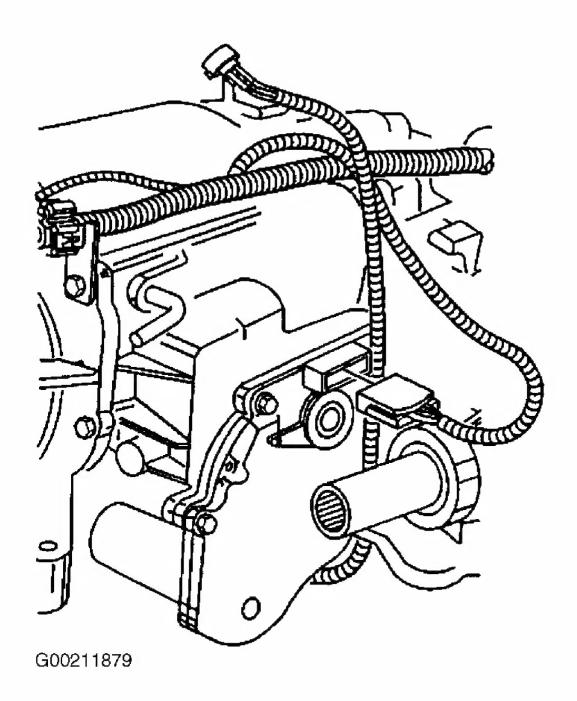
Removing Motor/Encoder Electrical Connector Courtesy of GENERAL MOTORS CORP.
